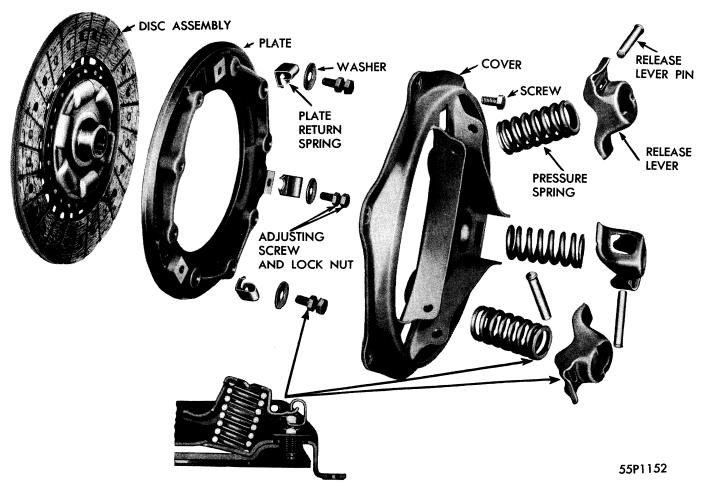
Auburn Clutch (91/4 inch) Disassembled
